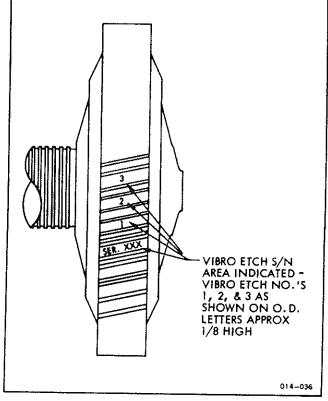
Blade Position Numbering on Turbine Wheel Hub.
